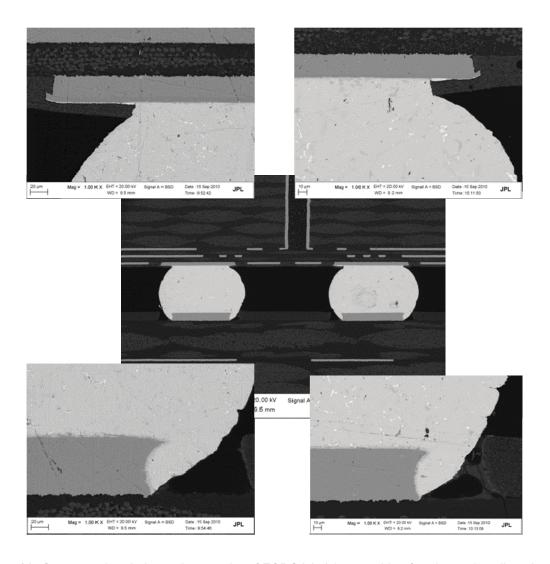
Cross-sectional photomicrographs of FCBGA1704 assembly after thermal cycling showing detailed metallurgical features of flip-chip solder balls at the package/board level.
